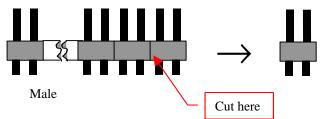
Cutting a CON2 male header. Insert the short leads of the male header into the PCB and solder on underneath side of the board.
